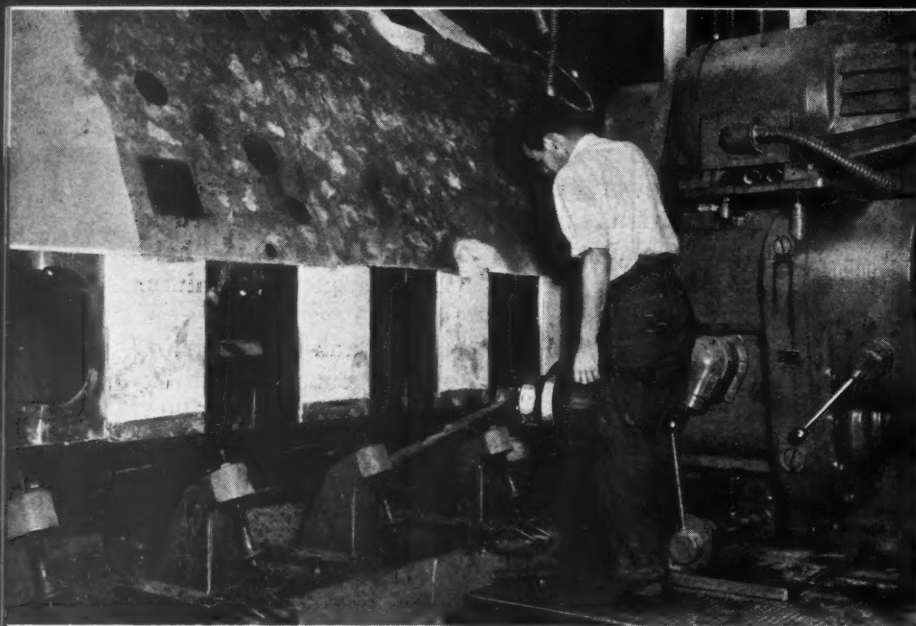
Surfaces around previously cut suspension-bracket holes are machined on an Ingersoll horizontal milling machine. Only one cut is taken, removing 1/16 to 1/4 inch of metal
